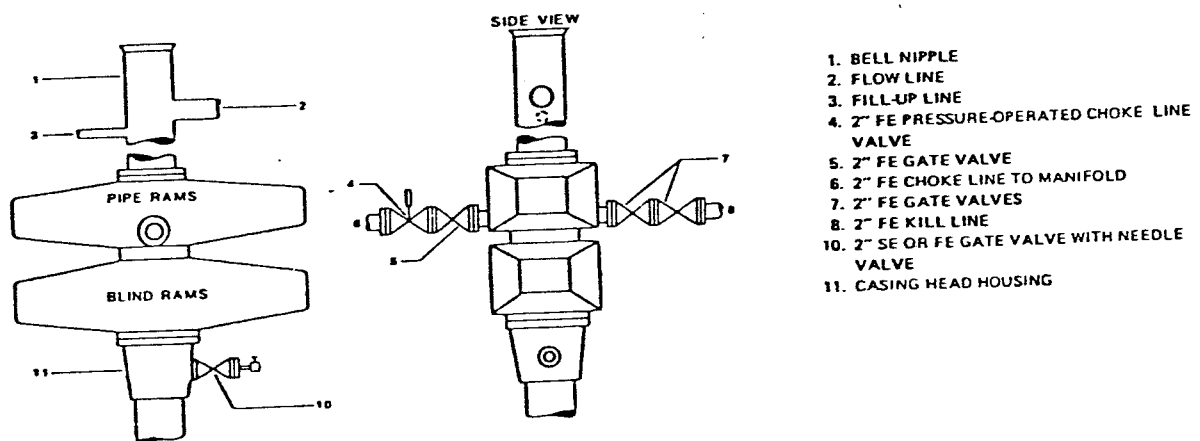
Standard Hydraulic Blowout Preventer Assembly
